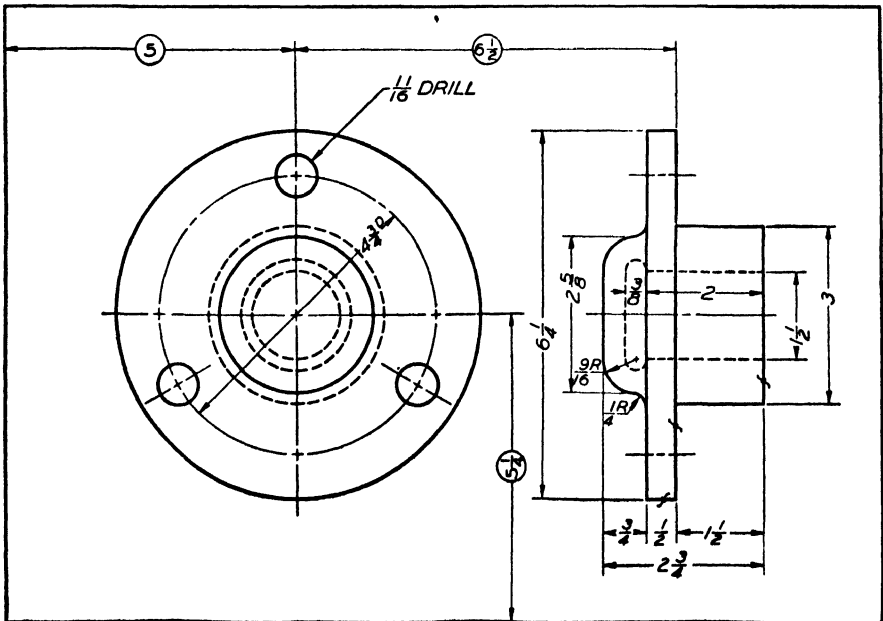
Prob. 148. Make a two-view drawing of the end cap showing the right-hand view in section.
